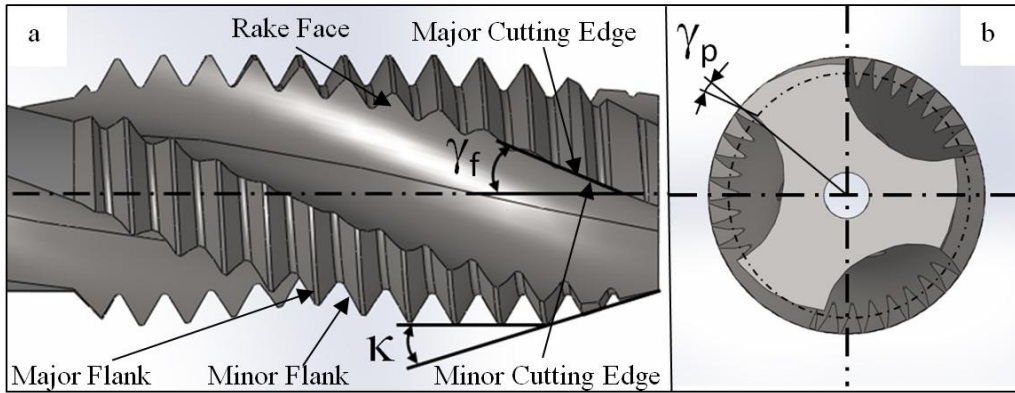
(a) Tapping tool with the chamfer length; (b) Cross section of the first major cutting edge with rake angle.
